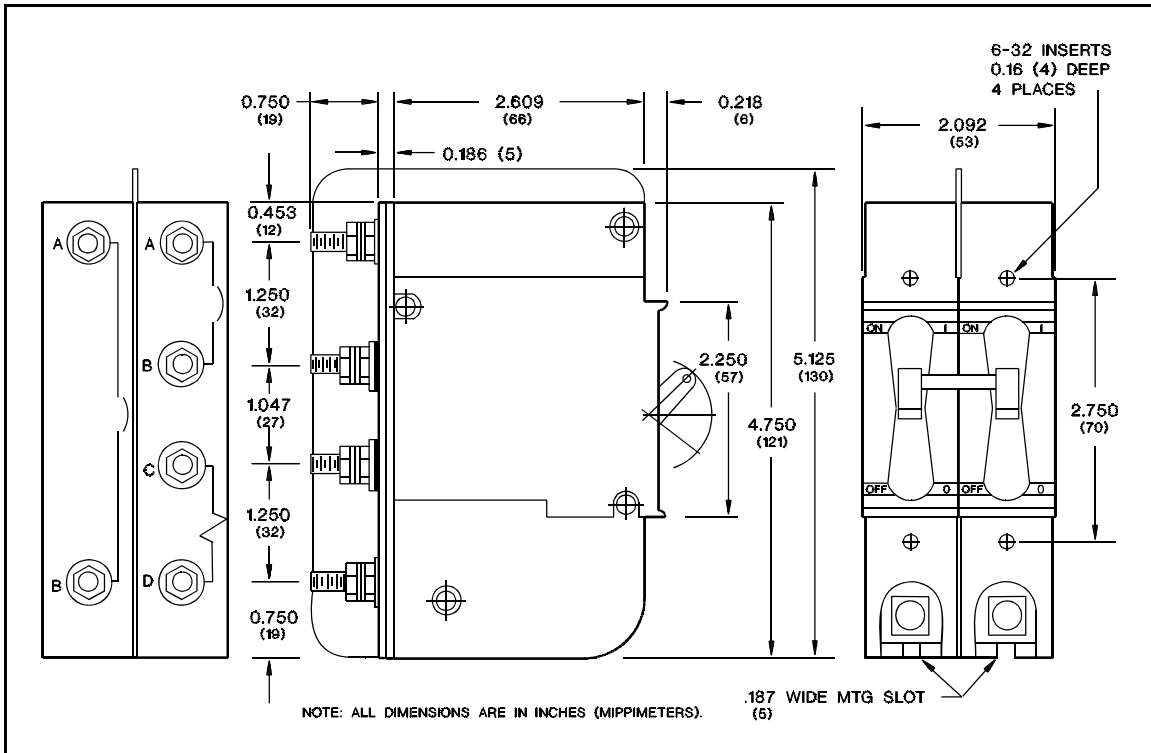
Double-Pole Circuit Breaker Outline Drawing.
